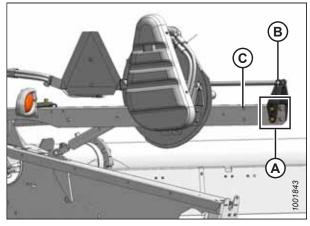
Right Reel Arm Cylinder in Forward Position
